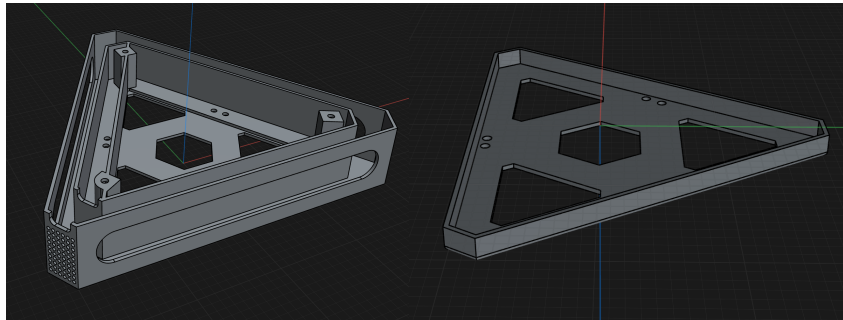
CAD renders of the 3D printed shells. Left: Outer shell. Right: Inlay
